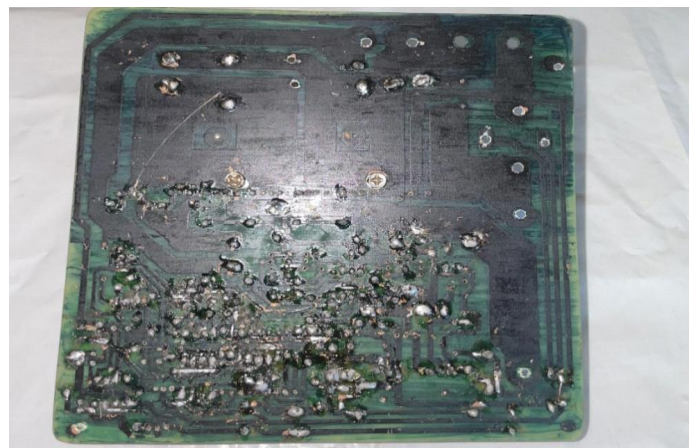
SOLDER WORK DONE ON THE CHARGE CONTROLLER BOARD
